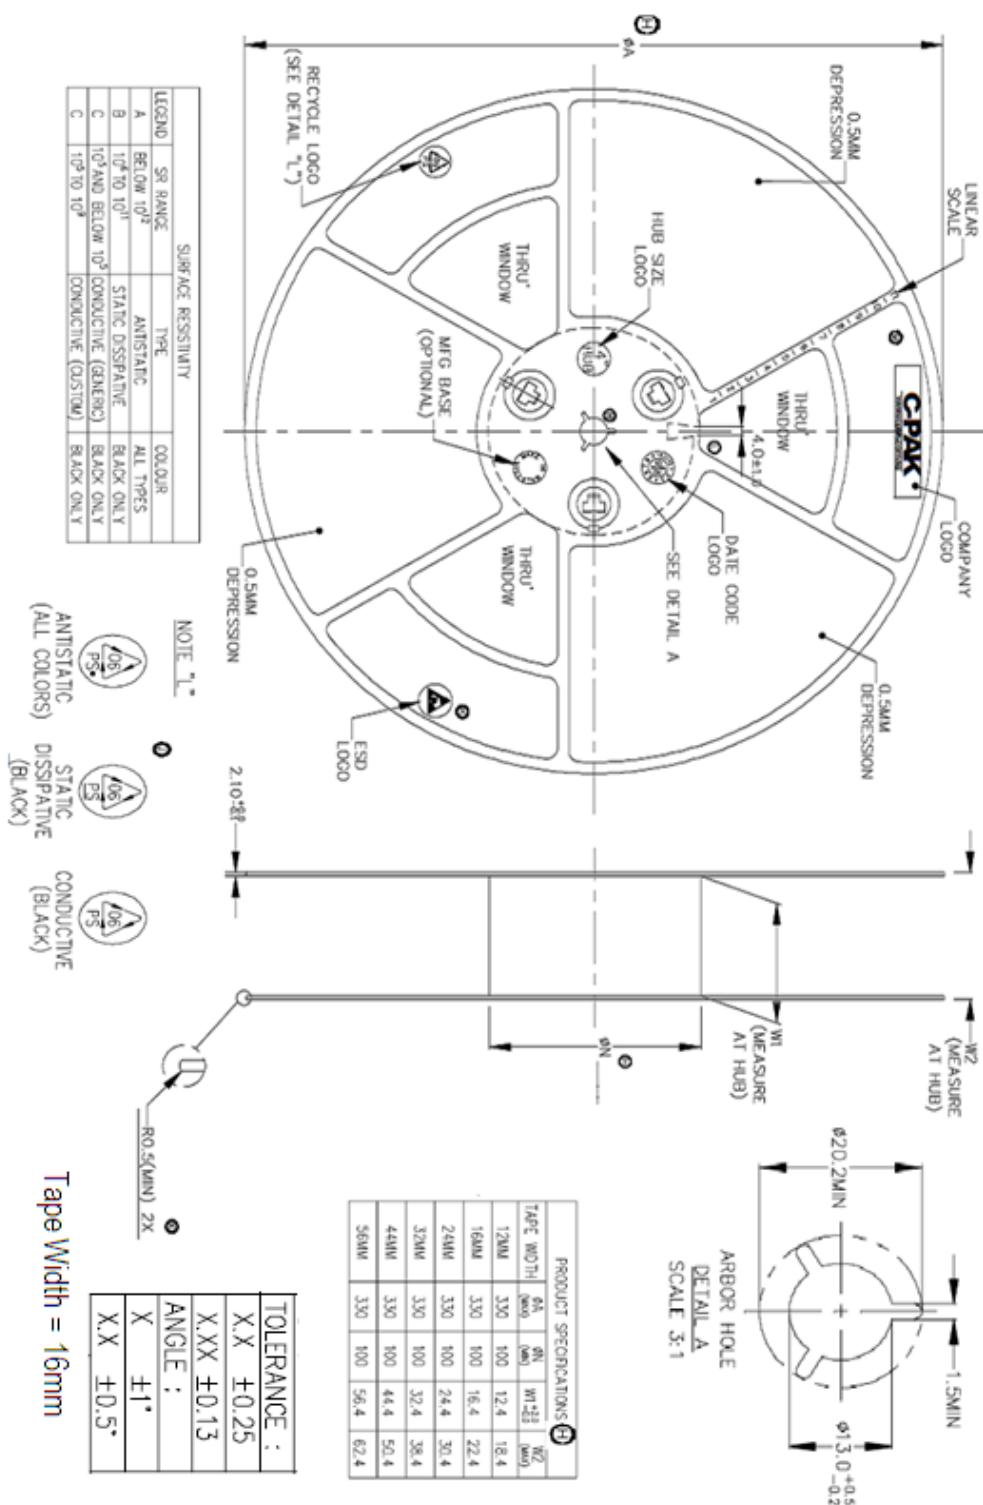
FT2232HQ and FT4232HQ Reel Dimensions
